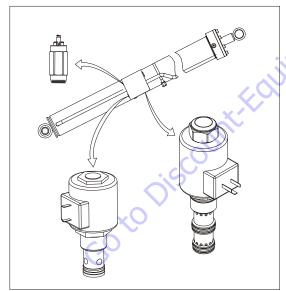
Lift Cylinder Holding Valve and Fitting
